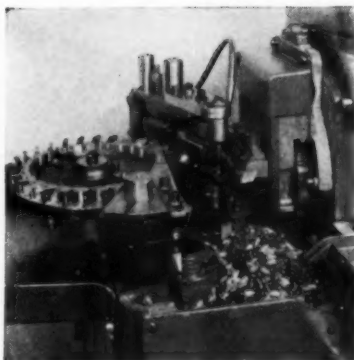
Close View of machine equipped with work feeding magazine and automatic work ejector.
